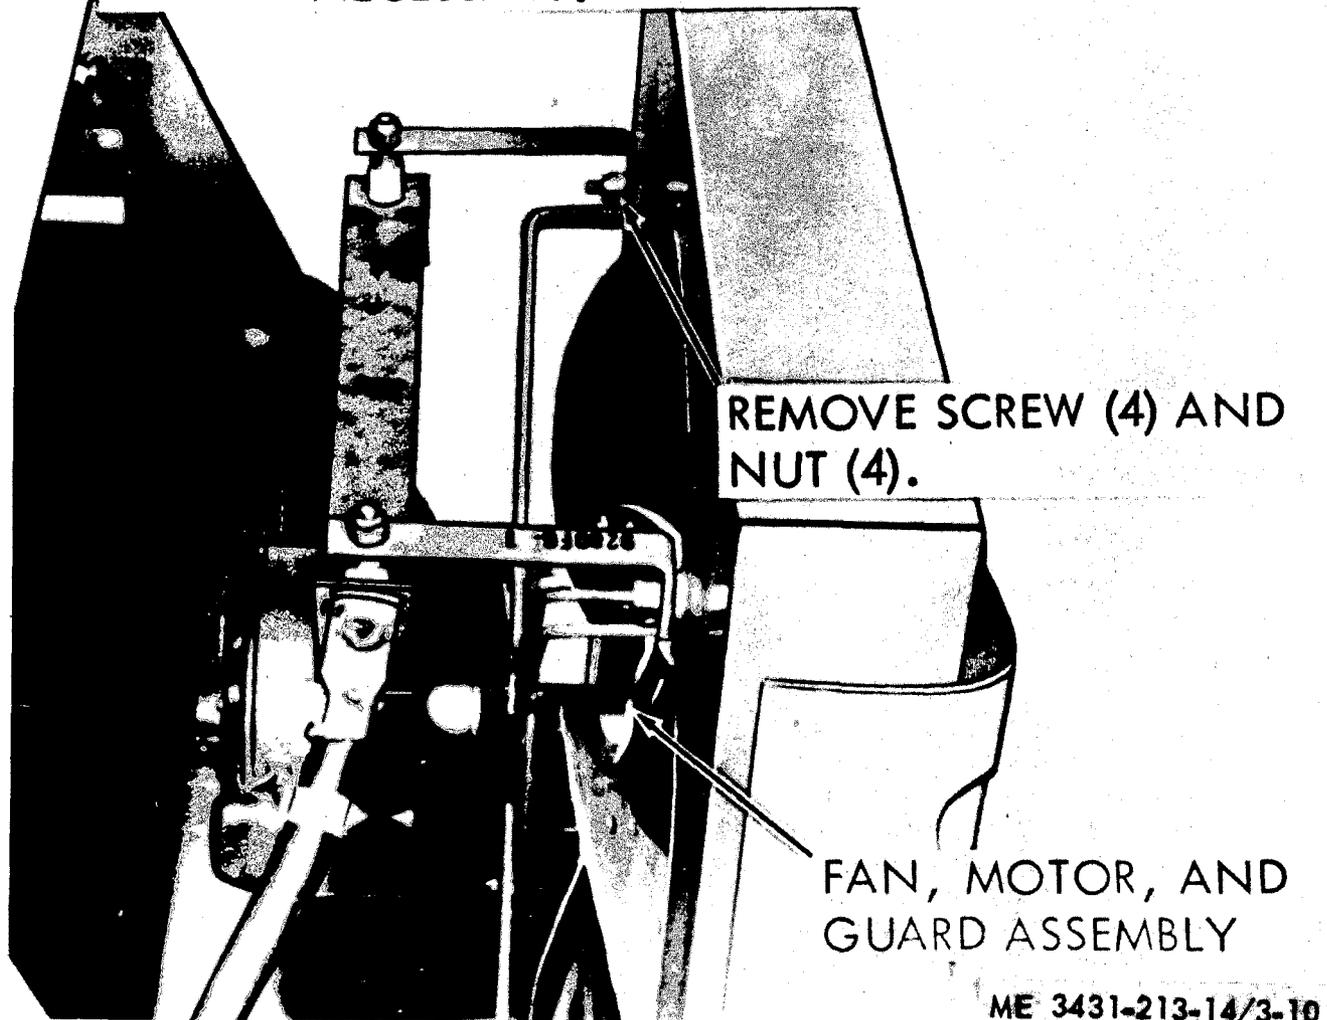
Fan, motor, and guard assembly, removal and installation.
